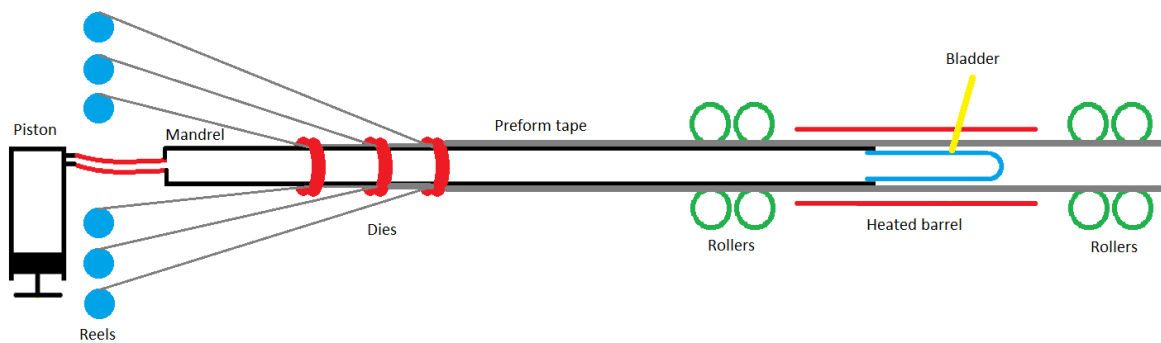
Schematic of significant parts in a completed pultrusion machine.
